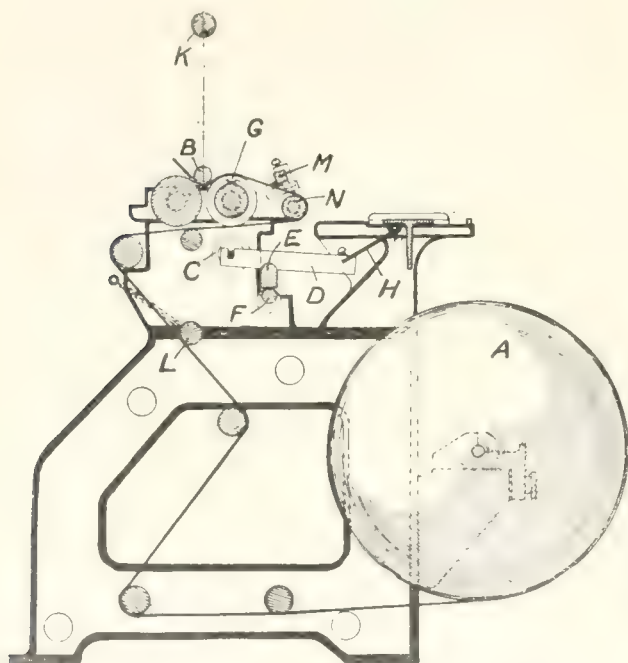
CAMERON MACHINE WITH CUTTING DISCS LOWERED.
